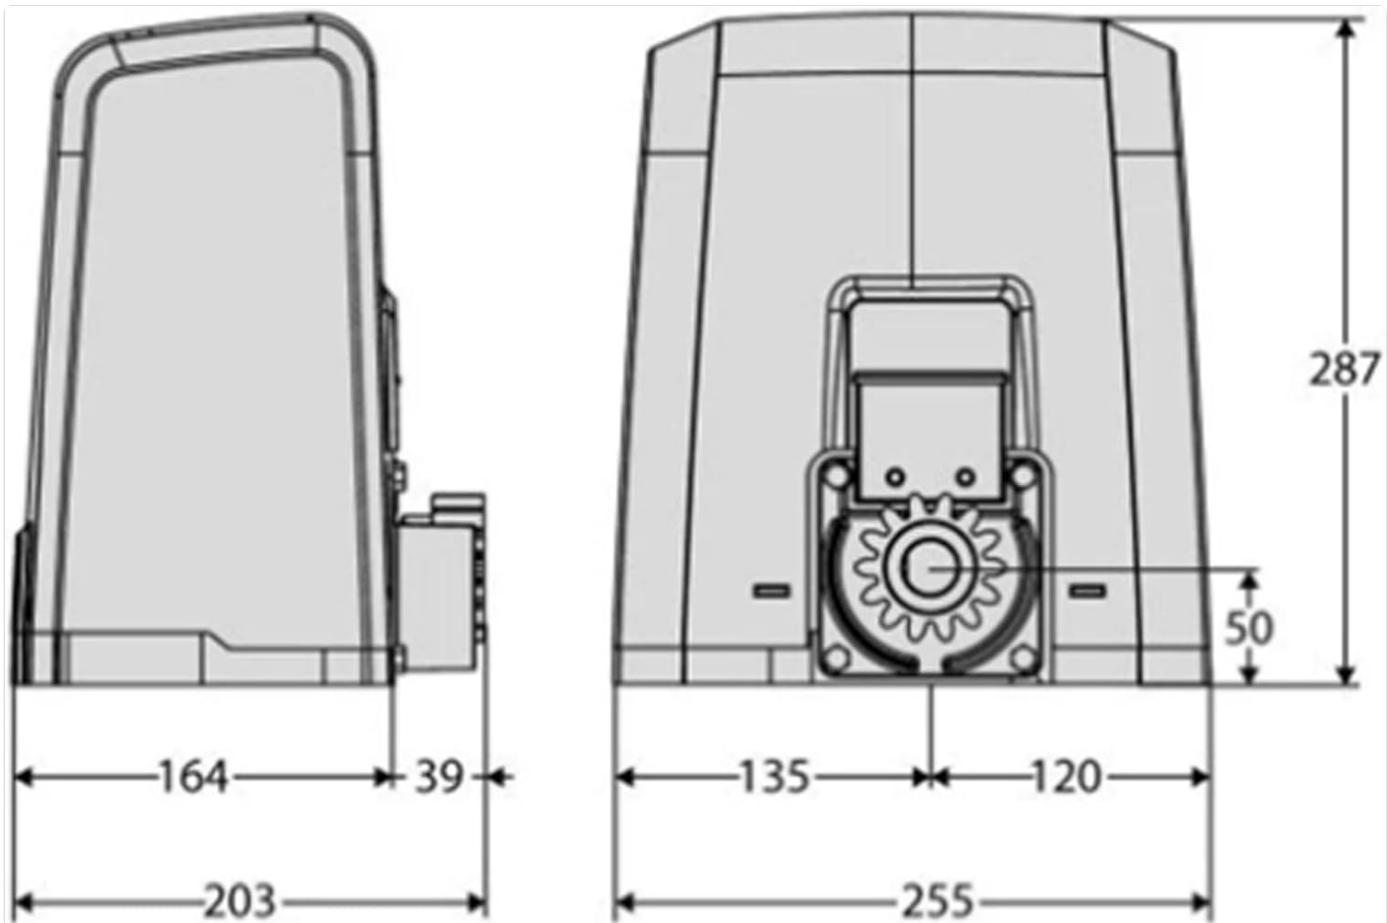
Dimensional drawing of the BFT Deimos Ultra BT A600 unit, showing key measurements in millimeters.
